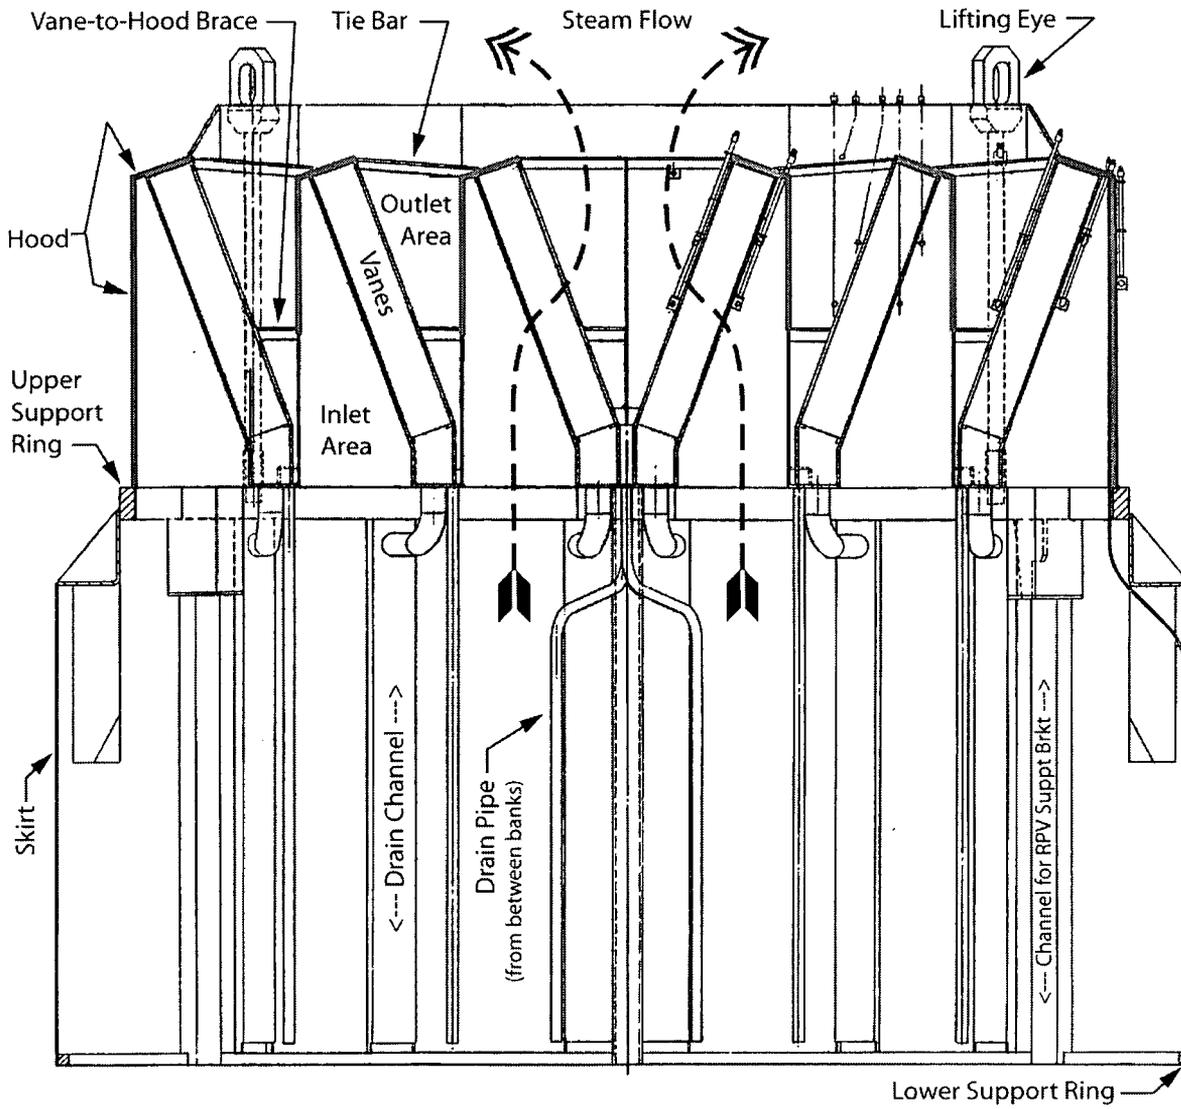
Cross-Section of BWR/2 Steam Dryer
